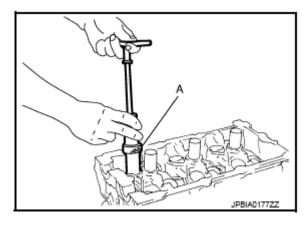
Removing Valve Oil Seal Using Valve Oil Seal Puller Courtesy of NISSAN NORTH AMERICA, INC.
